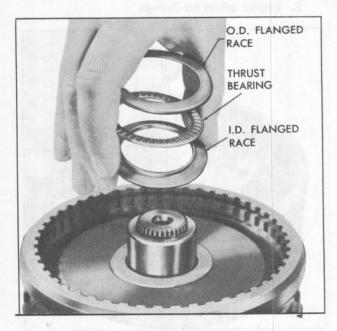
Installing Thrust Bearing on Outer Face of Rear Internal Gear
